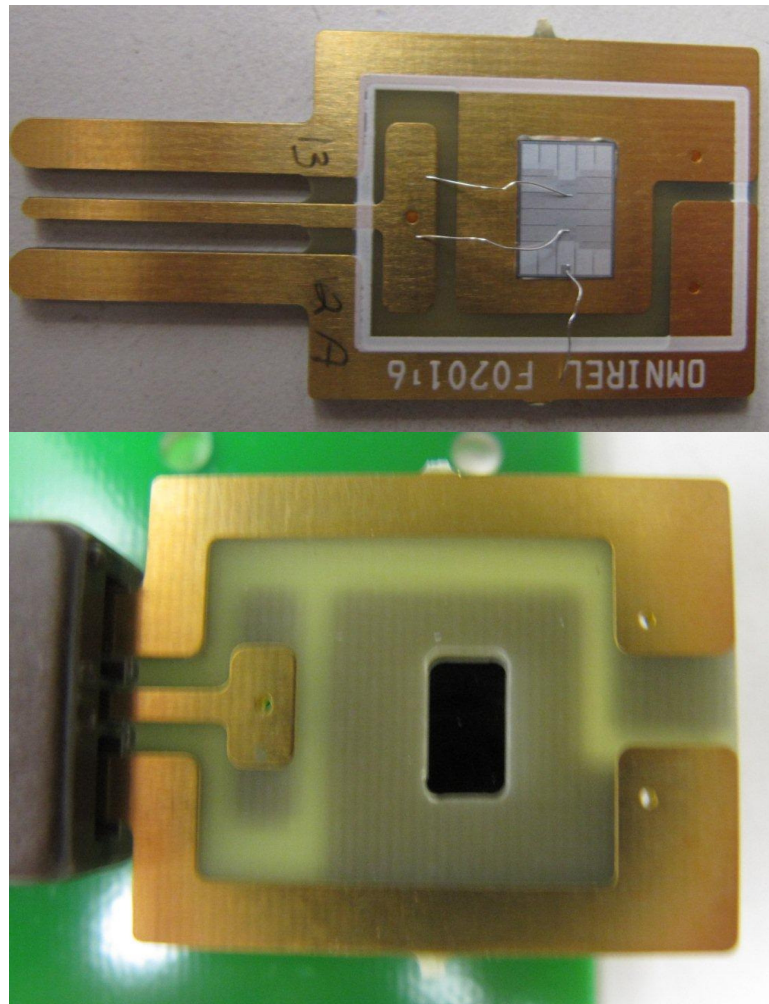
Sample prepared for backside TPA laser testing. Top: Frontside showing the die wire-bonded to the package. Bottom: Backside showing drilled window in the package to expose the well-polished back surface of the drain substrate.
